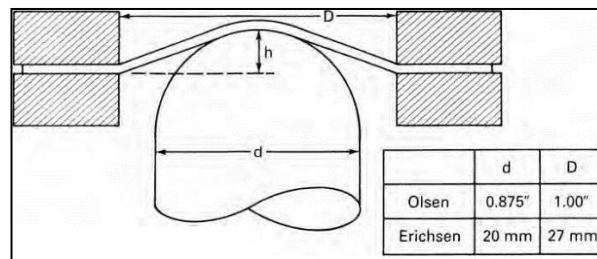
Schematic view Olsen and Erichsen tests using a hemispherical tool (Hosford and Caddell, 2011)
